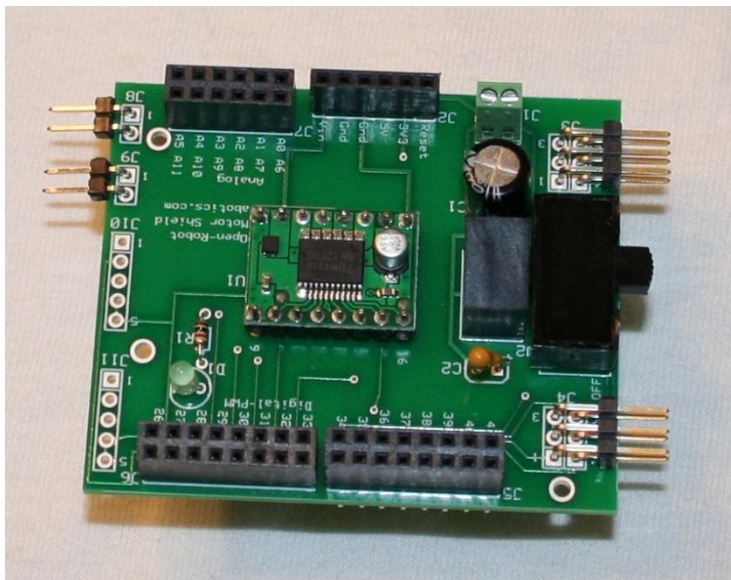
Solder Stackable Headers, J2, J5, J6 & J7.
